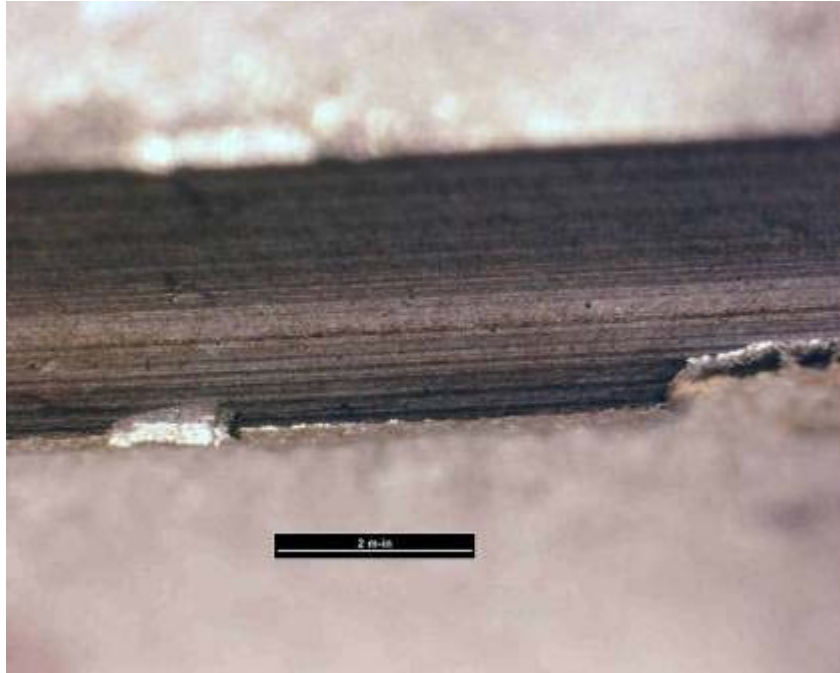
Typical tool marks, tooth root fillet, between teeth 15 and 16.
